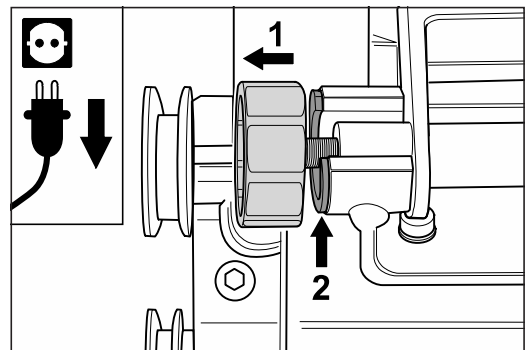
until the two nuts used to fit into the motor bearing bracket are exposed.
